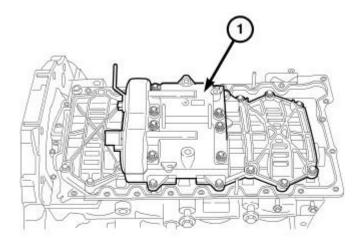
Balance Shaft Tool Courtesy of CHRYSLER LLC
